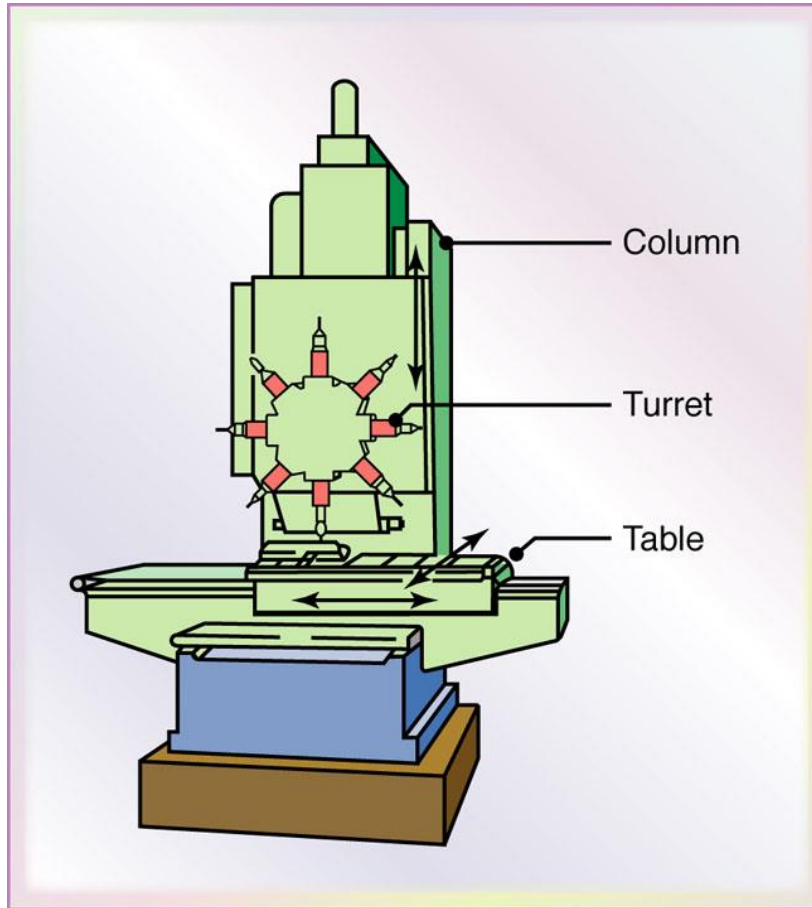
A three-axis computer numerical-control drilling machine. The turret holds as many as eight different tools, such as drills, taps, and reamers.
